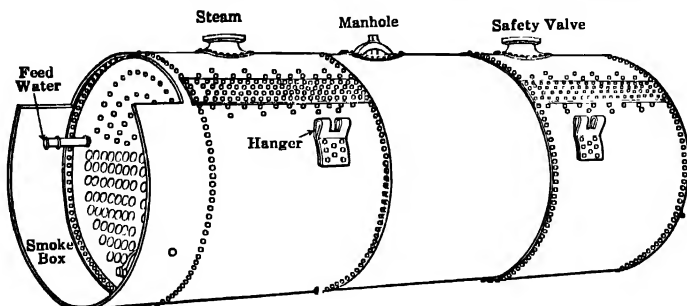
Horizontal Return-tubular Boiler — Extended Shell.
